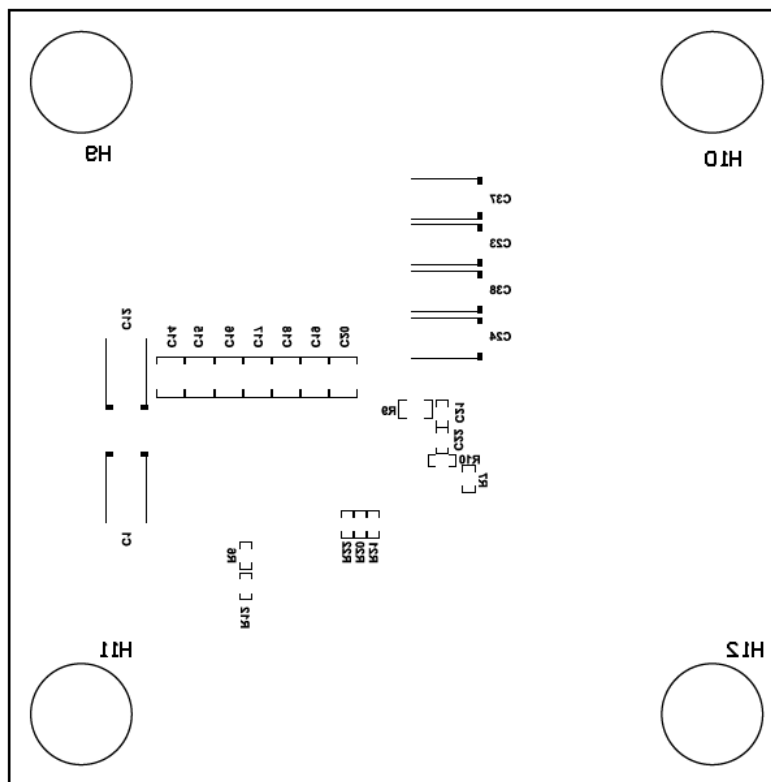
PWR-784EVM Bottom Overlay Layer (Top View)
